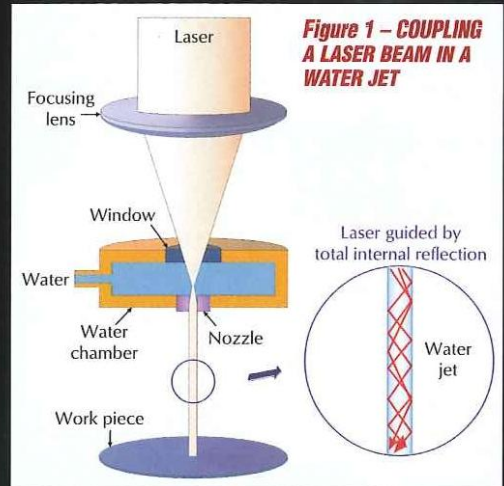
COUPLING A LASER BEAM IN A WATER JET
